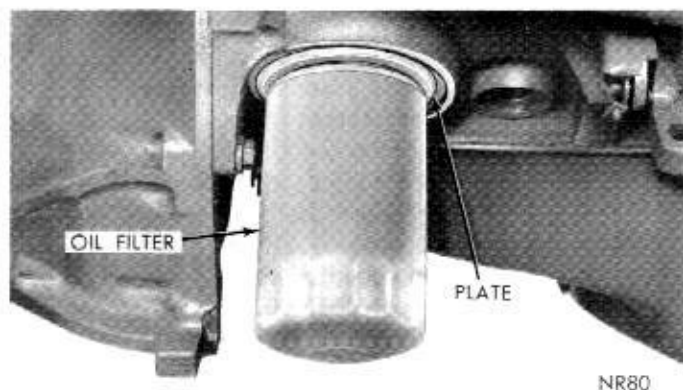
Engine Oil Filter (318 Cu. In. Engine)
